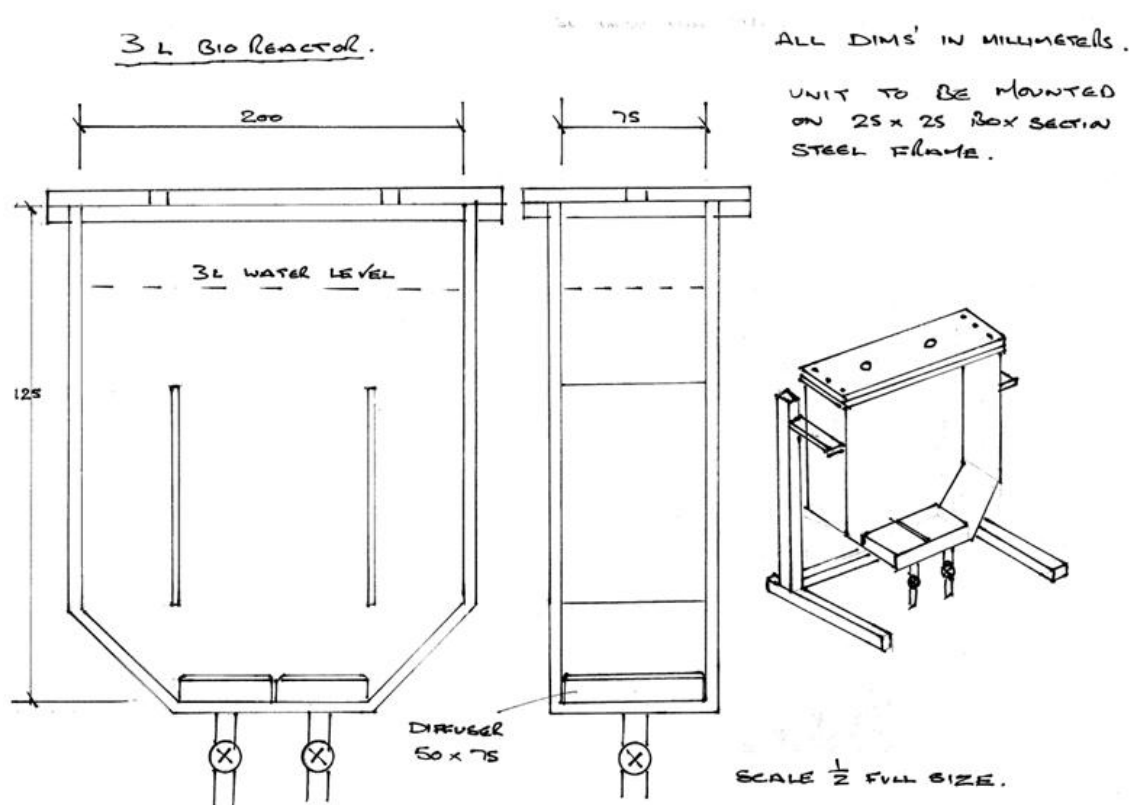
Technical drawing of 3L flat plate photo-bioreactor design.
